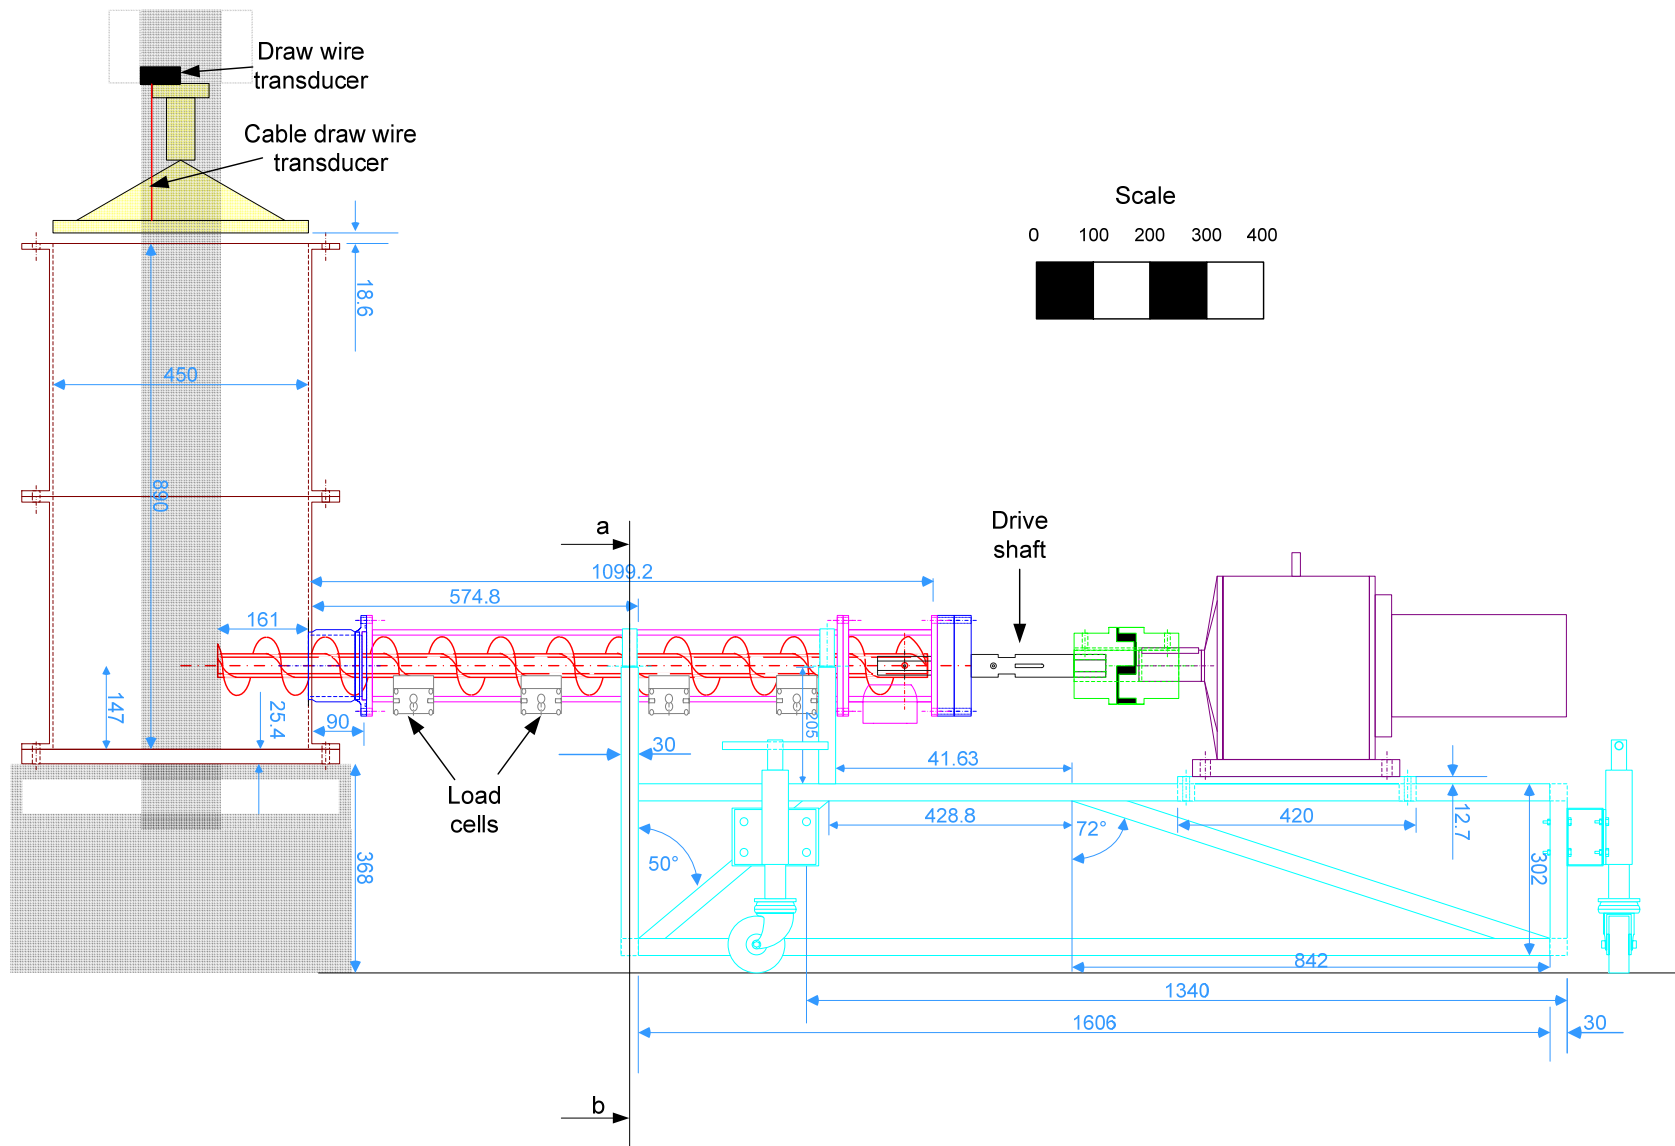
Side view general arrangement of Oxford screw conveyor.
